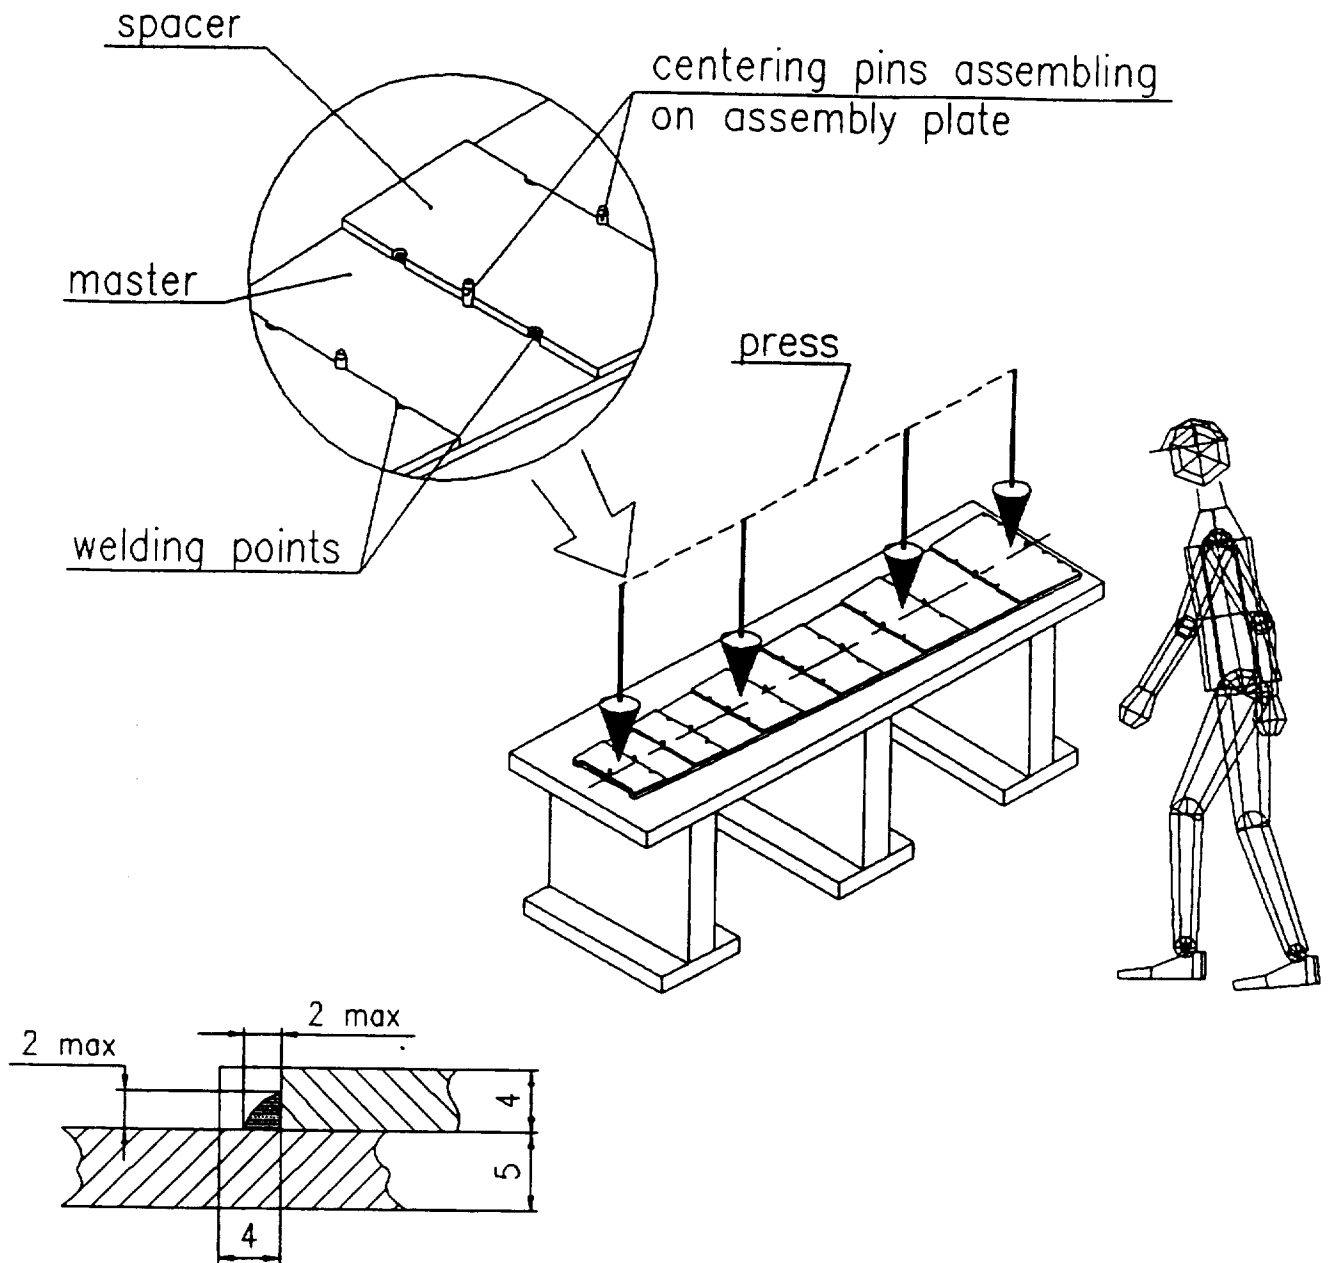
Assembly of half-period (welding of spacers to master).
